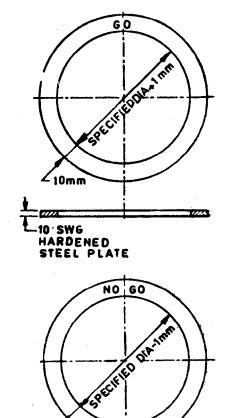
Ring Gauge for Testing Diameter of the Shell
